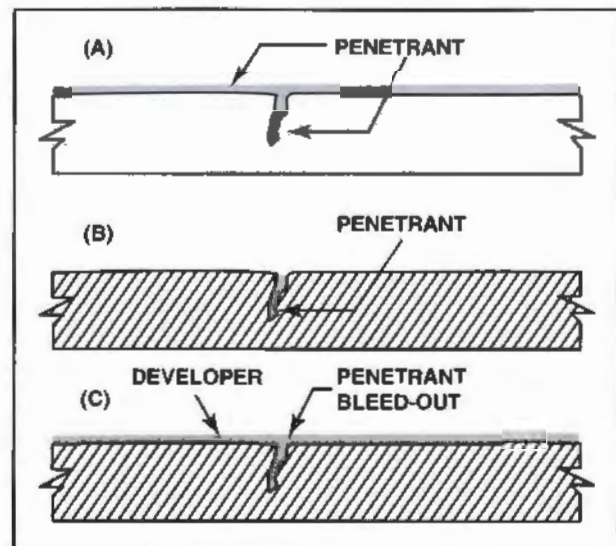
(A) When performing a liquid penetrant inspection, spread penetrant over the surface of the material being examined and allowed sufficient time for capillary action to take place. (B) Wash excess penetrant from the surface; leave any cracks and surface flaws filled. (C) Spray an absorbent developer over the surface to blot out any penetrant. A crack will show up as a bright line against the white developer.
